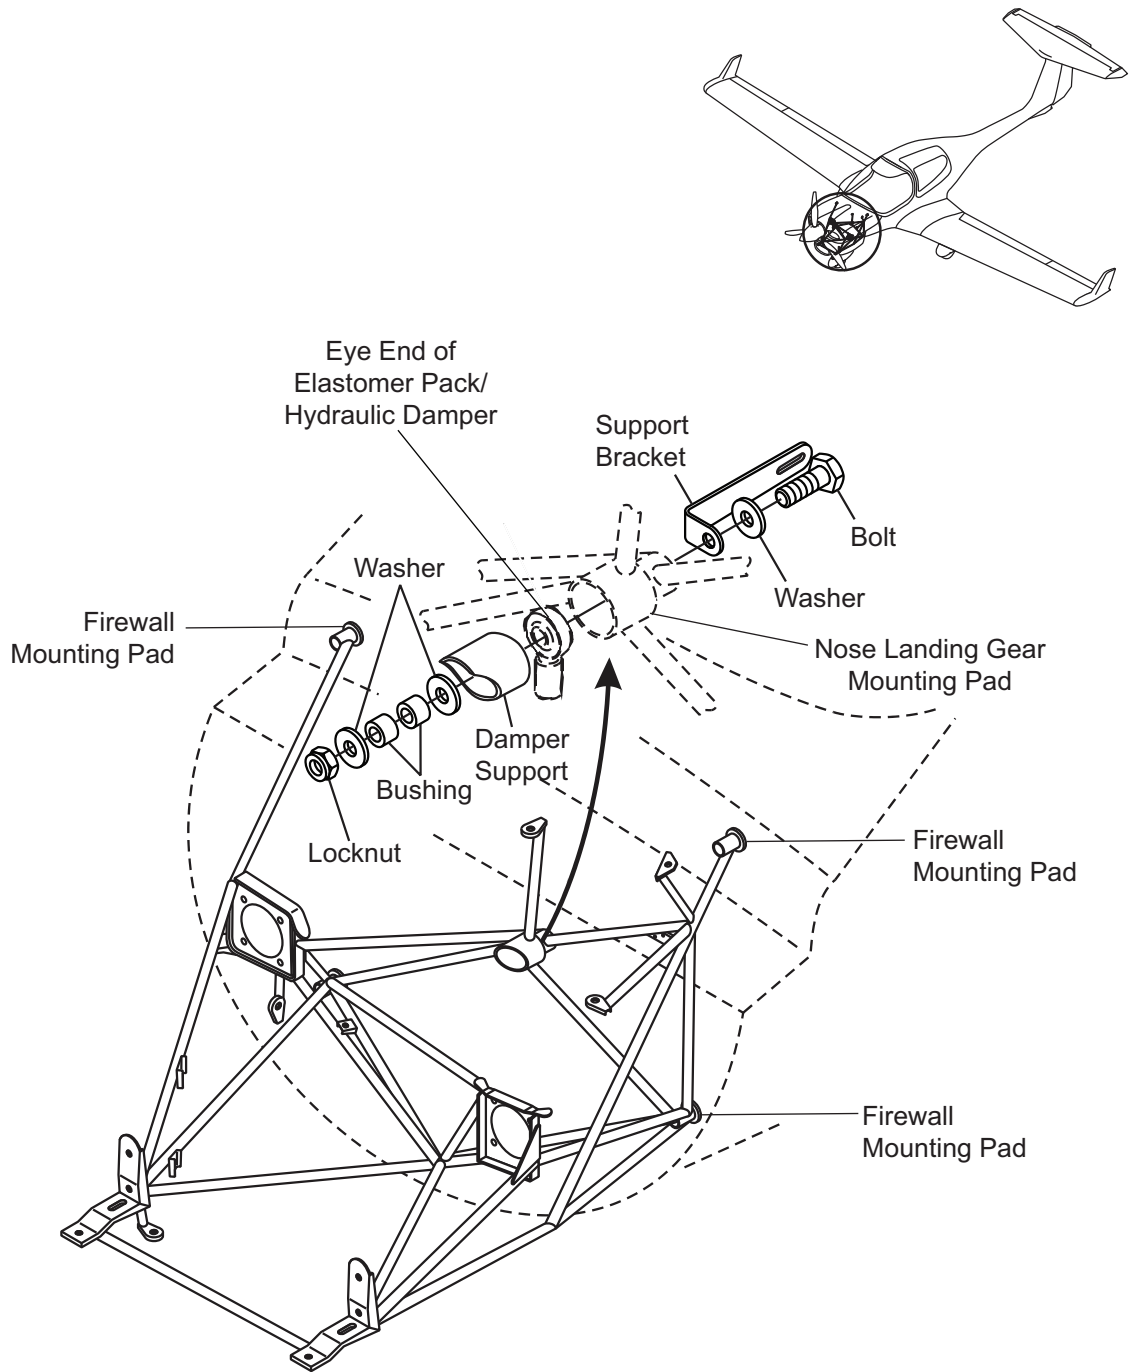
Elastomer Pack / Hydraulic Damper at the Engine Mount
